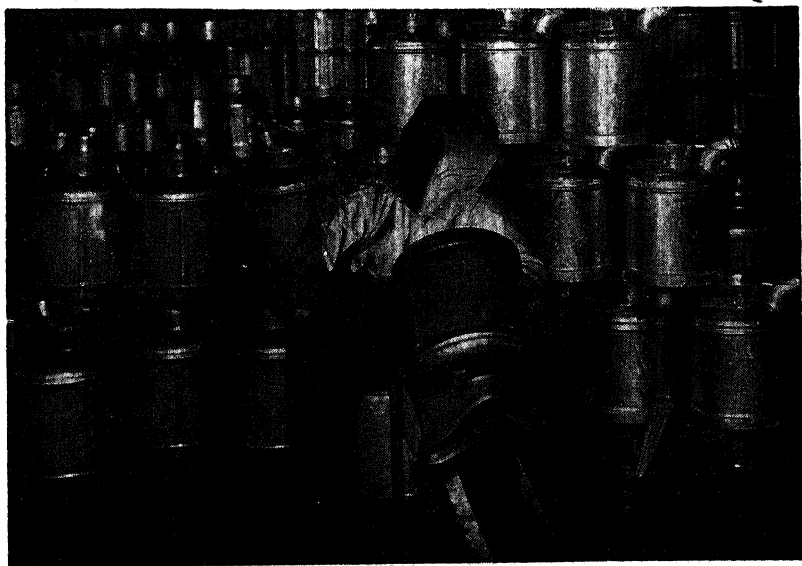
Welding gasoline cans of 18-gauge and 20-gauge steel.
